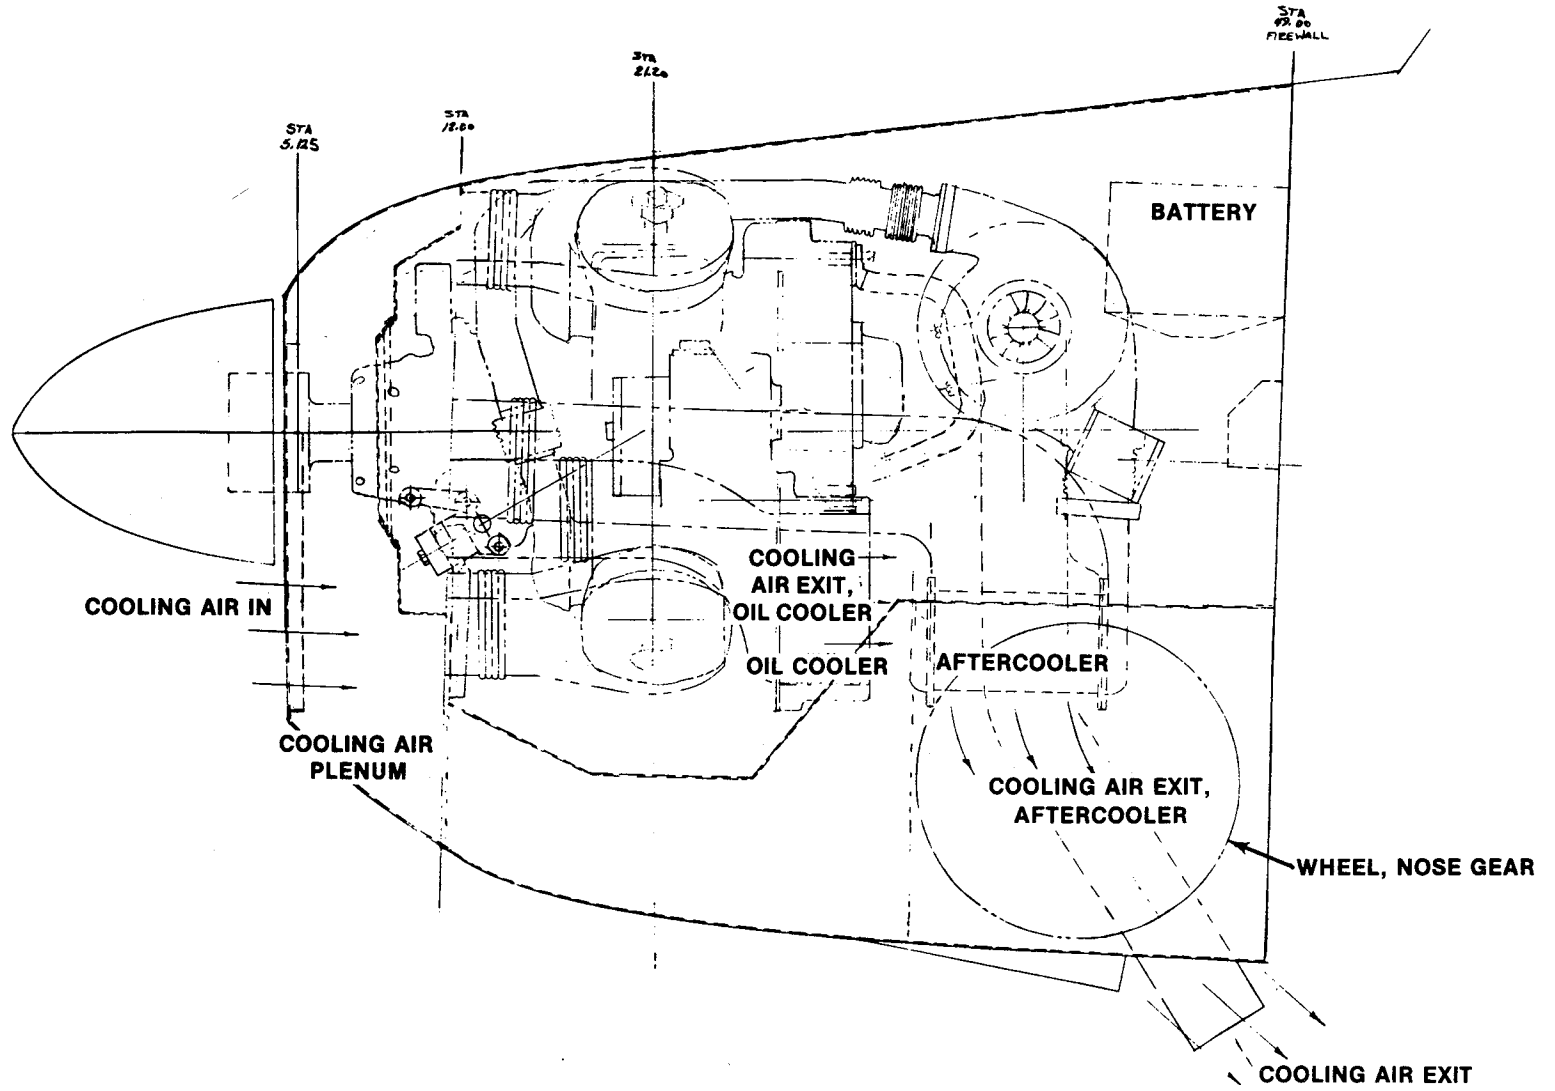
SIDE VIEW SINGLE INSTALLATION
